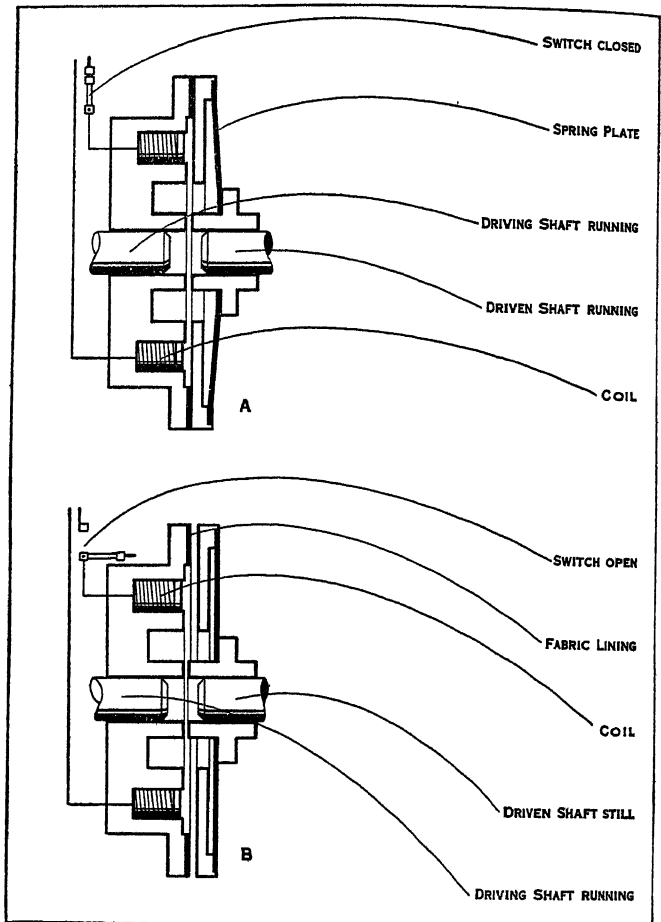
VIEWS OF MAGNETIC CLUTCH, A. SHOWING CLUTCH WITH CURRENT ON. B. WITH CURRENT OFF. IN WHICH MAGNETIC PULL BRINGS SURFACES TOGETHER WHEN THE CURRENT IS TURNED ON, TRANSMITTING OVER 2,000 HORSE-POWER IN THE LARGE CLUTCHES
